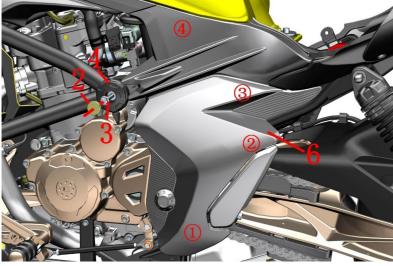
SI	DE COVER	SIDE COVER COMPONENT	CHK	40)
